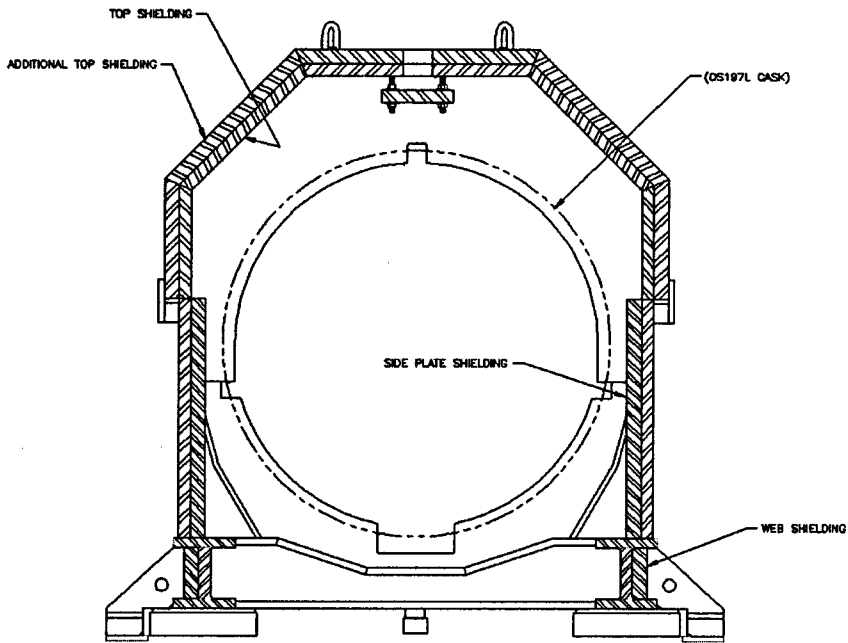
Cross-Section View through OS197L Transfer Skid
